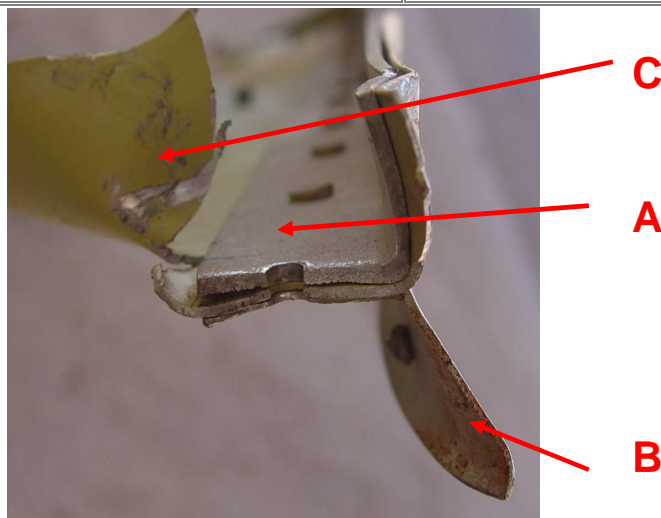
Fracture surface, cabin truss (stereo)
